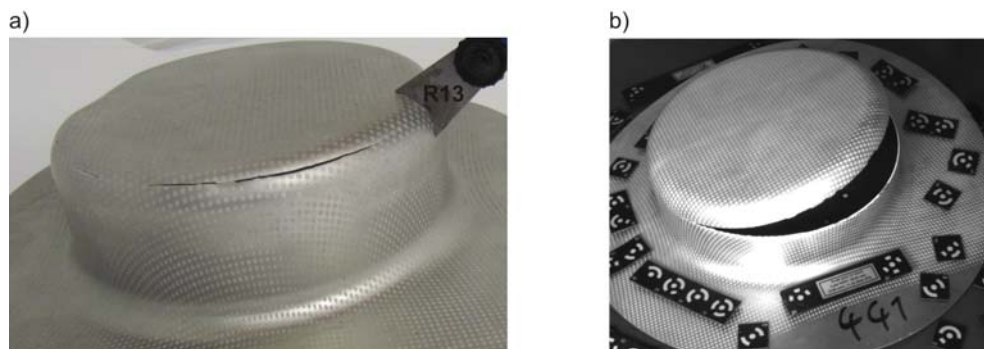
a) The sharpest radii reached by the process chain without failure is 13 mm. b) One-step deep drawing cannot reach 15 mm punch edge radius under 520 kN blank holder force.
